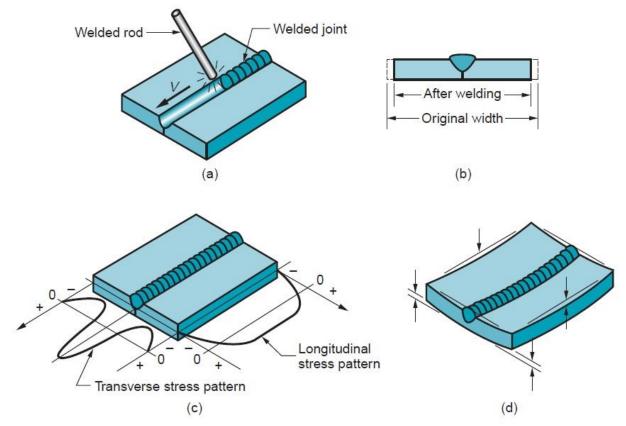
(a) Butt welding two plates; (b) shrinkage across the width of the welded assembly; (c) transverse and longitudinal residual stress pattern; and (d) likely warping in the welded assembly.
